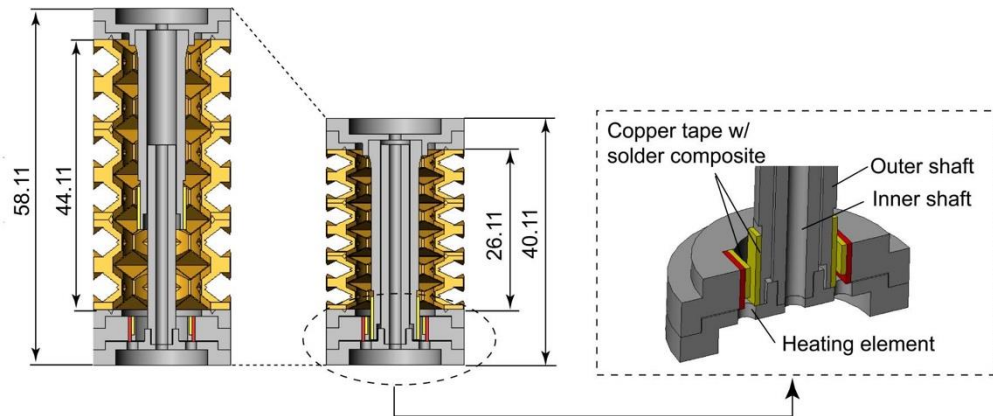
Locked and unlocked states of the prismatic joint (left) and integrated solder-based locking mechanism in the prismatic joint (right) [12].
